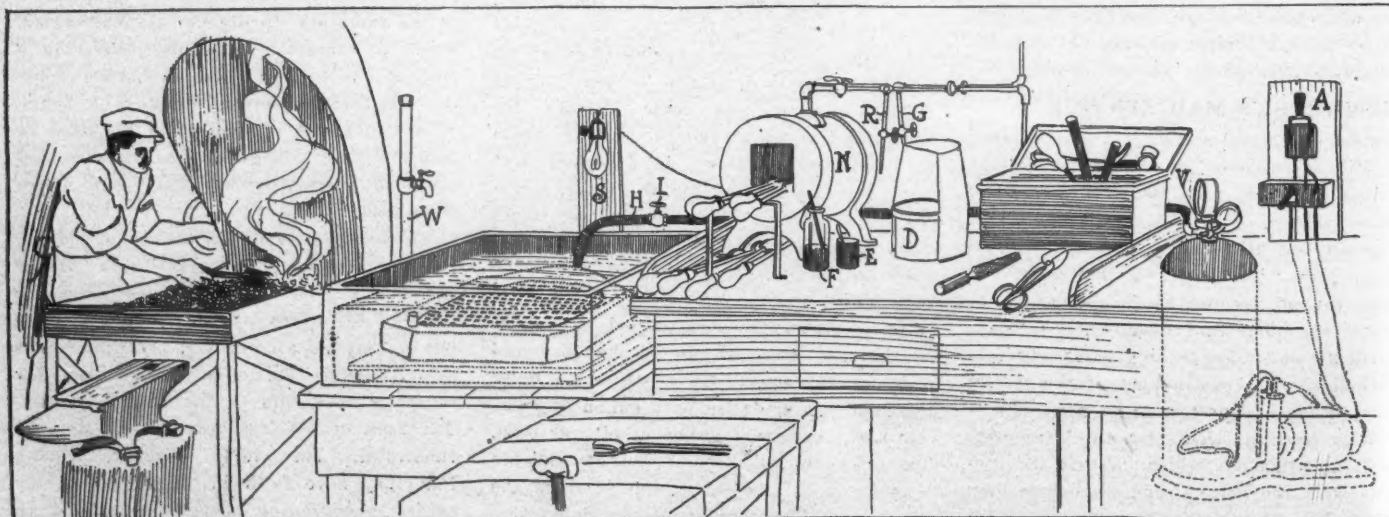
A SECTION OF THE CHICAGO MOTOR CAR CO.'S. REPAIR SHOP, SHOWING SOLDERING AND RADIATOR-TESTING OUTFIT AND FORGE—A, SWITCH AND STARTING-BOX OF AUTOMATIC AIR SUPPLY SYSTEM; D, DIPPING POT FOR CLEANING IRONS; E, DILUTE CUT ACID; F, CUT ACID; N, OVEN
